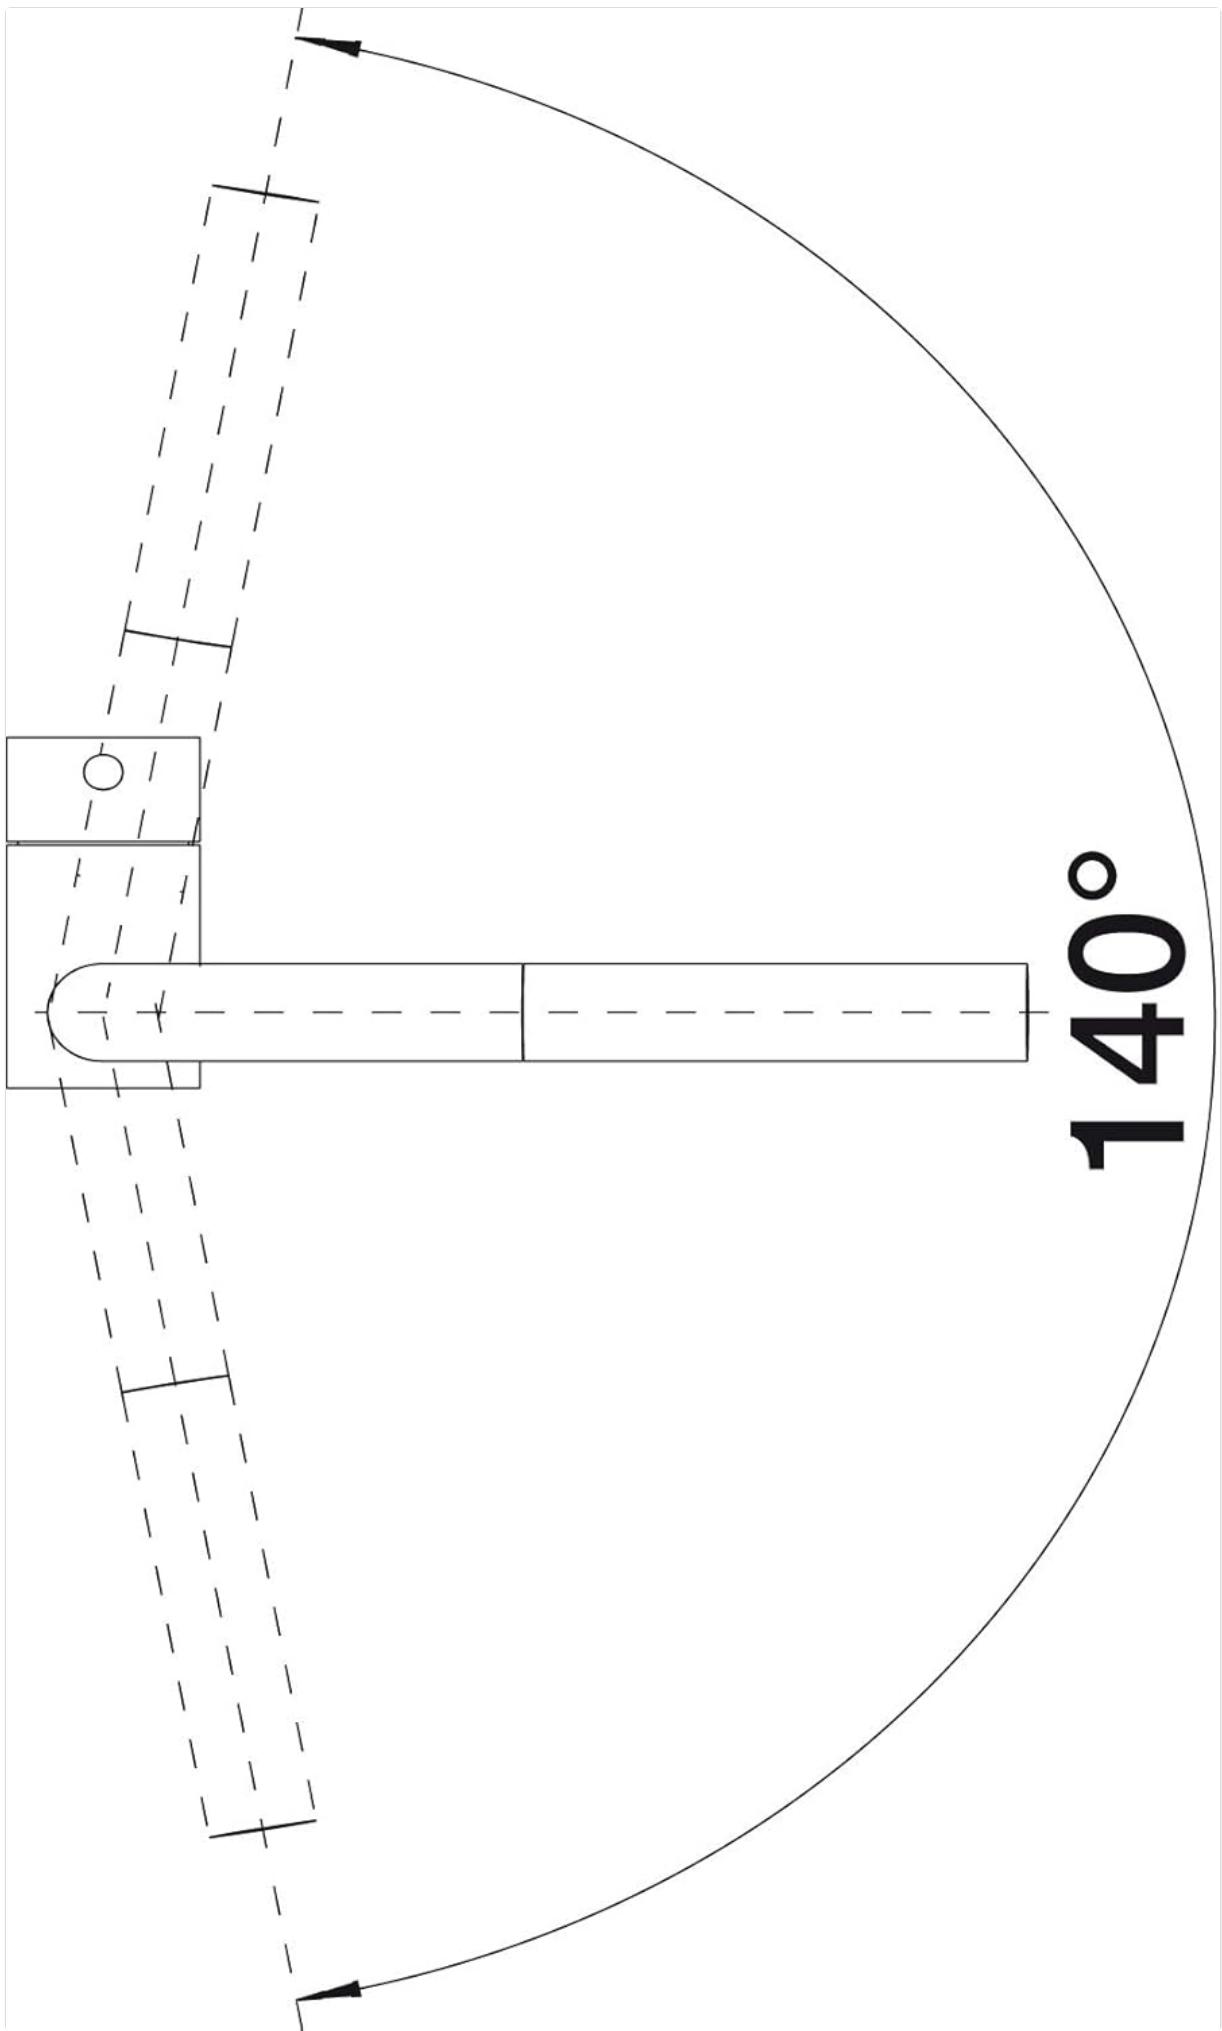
Detailed dimensional drawing of the BLANCO Linus-S 518813 faucet.
